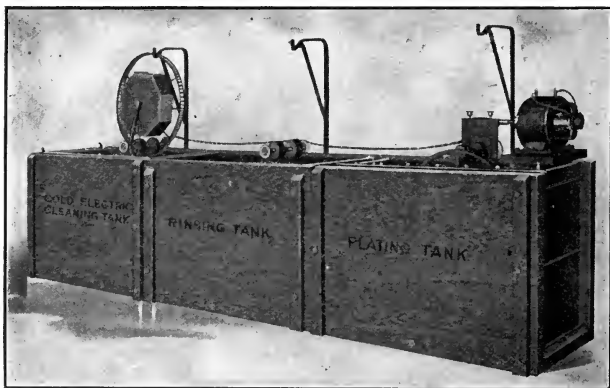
FRONT VIEW OF COMPLETE PLATING UNIT
